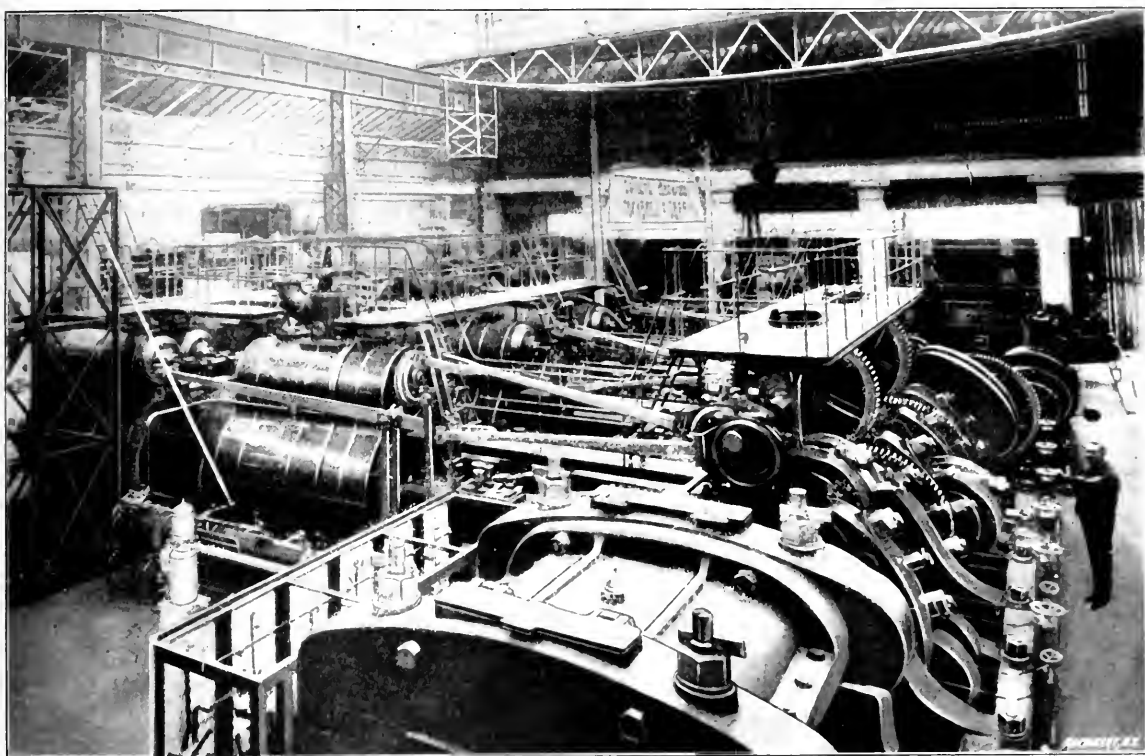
The Cockerill Ten Thousand Horse Power Rolling Mill Engine.
